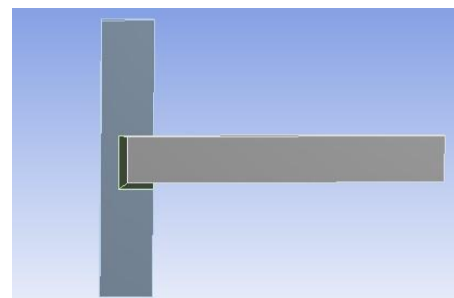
Unsymmetrical eccentric loaded welded joint
